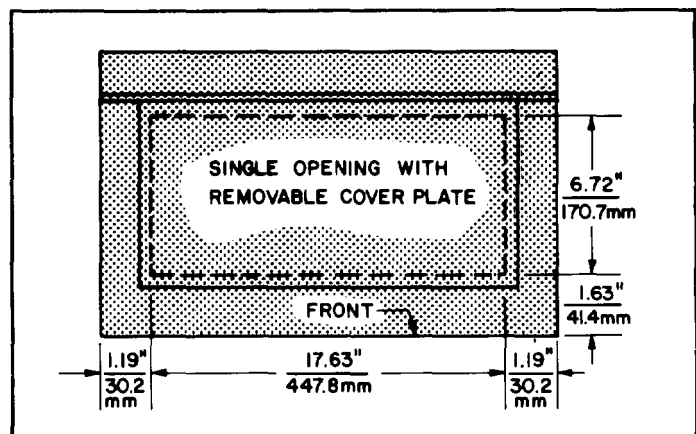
Top conduit entrance space 13-inch (330 mm) deep section.
